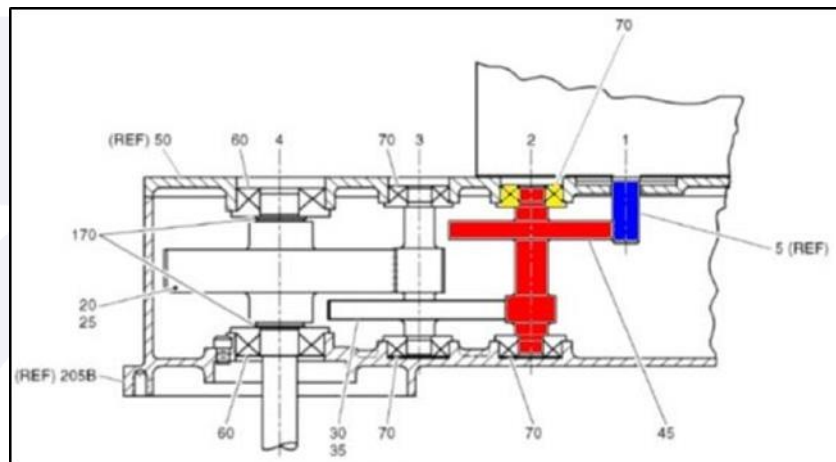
Identification of the electric engine / gearbox coupling components to the central body of the Servo Drive.
